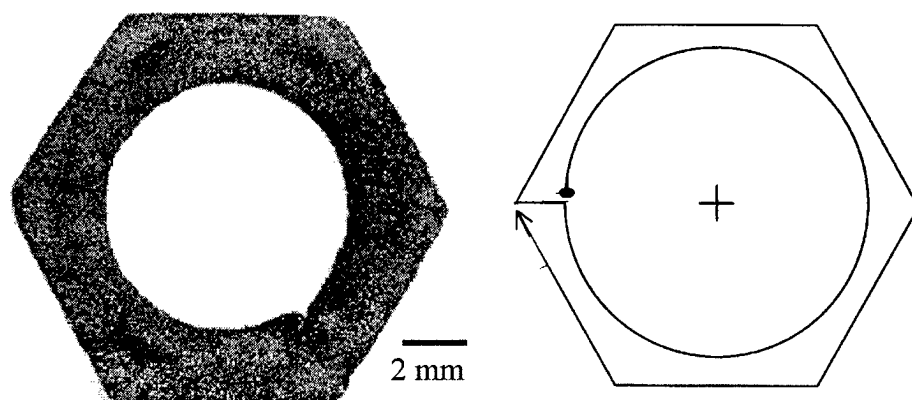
SALDVI SiC 15 layer shape and build pattern.
